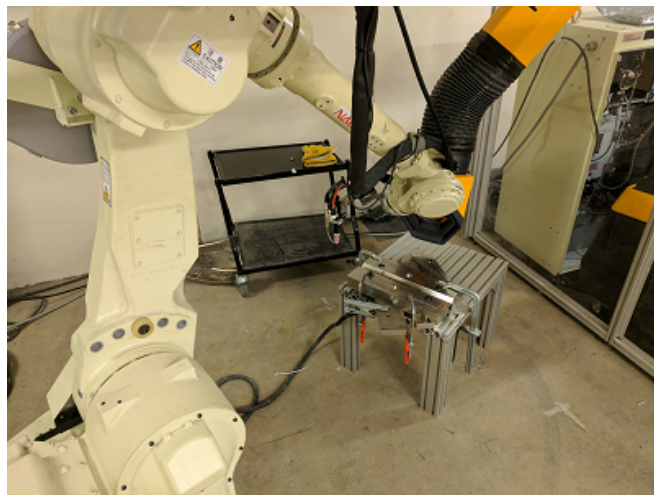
Lab set-up of the welding task. The welding robot is a NACHI MC70. The actual monitoring robot is not shown in this set-up.
